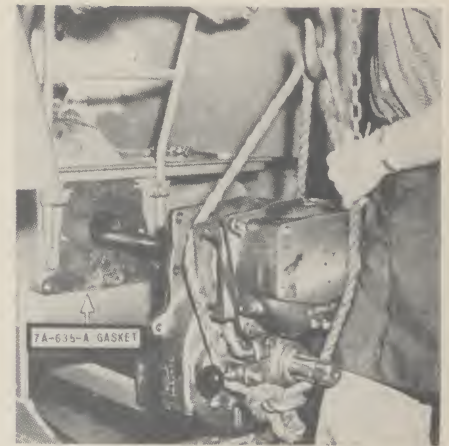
Removing pto clutch and belt pulley housing and drive shaft assembly from tractor.
